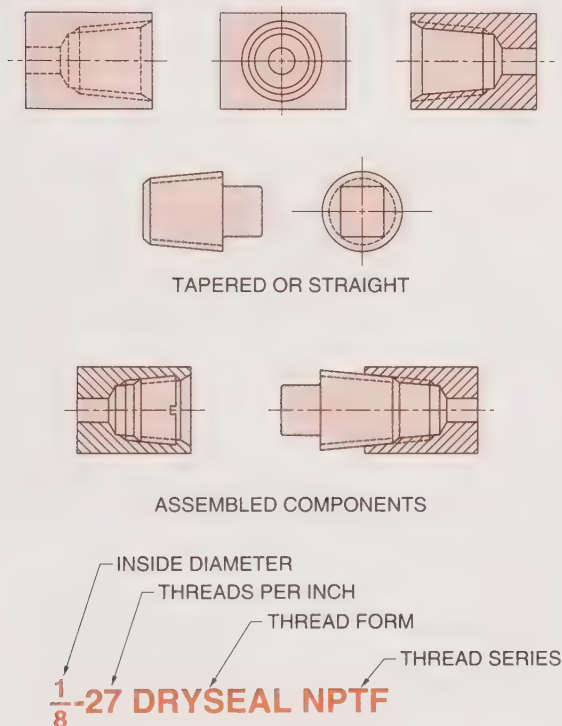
Pipe thread is shown on a drawing by the conventional simplified representation.
